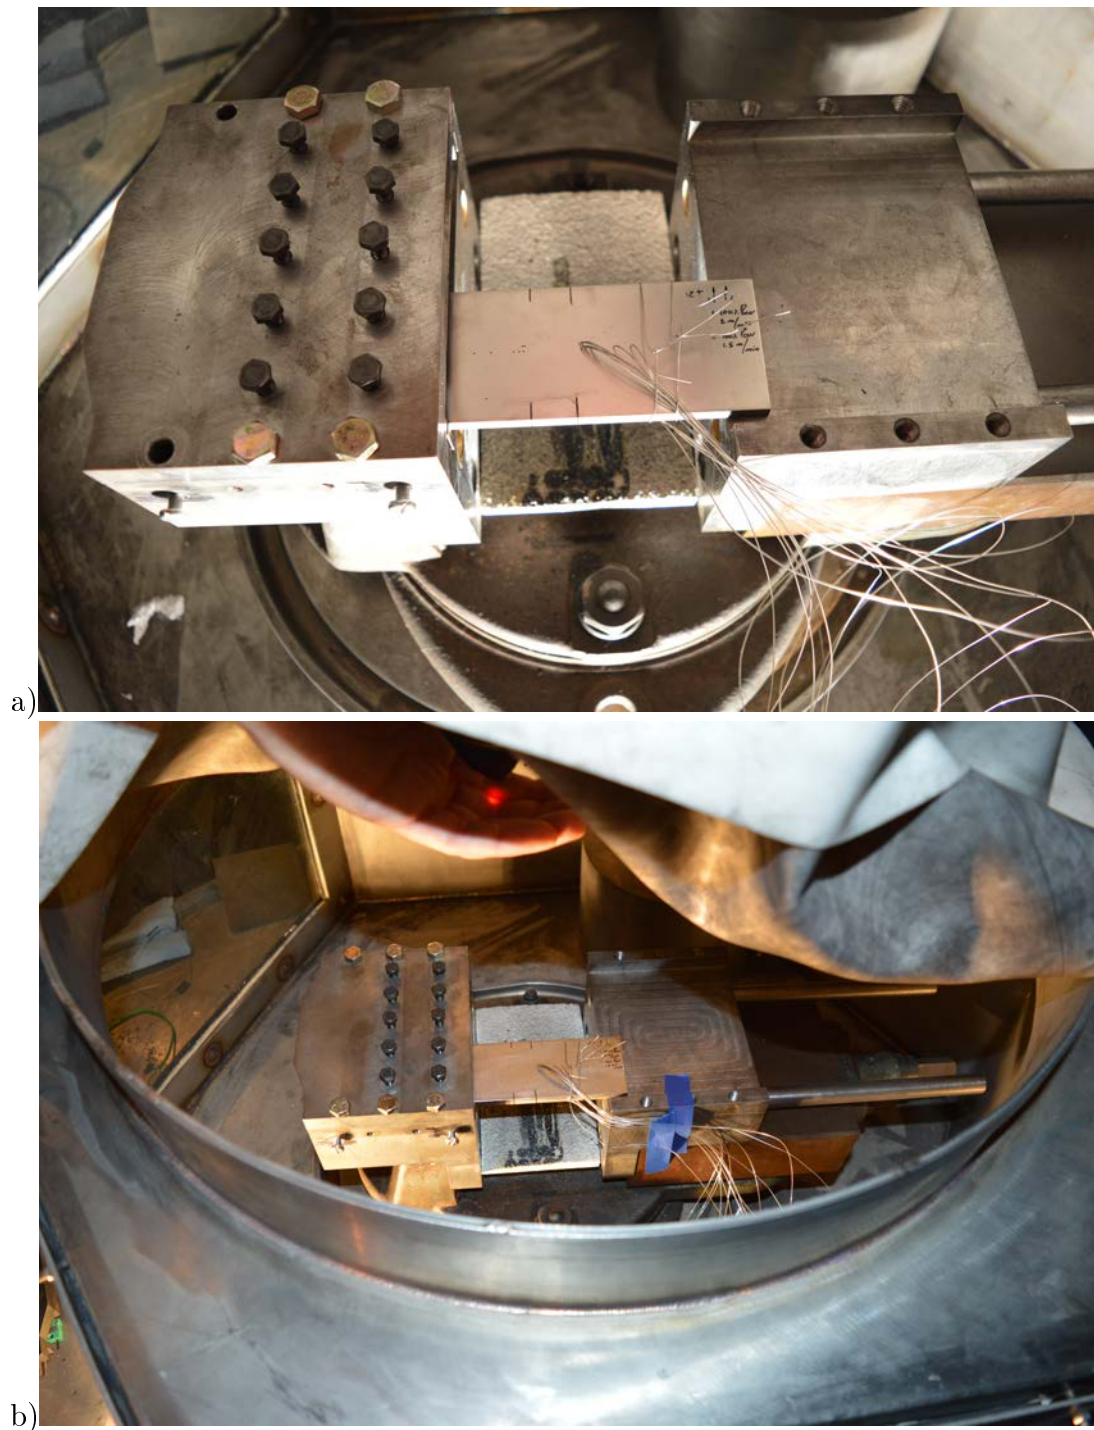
Photographs showing a) the jig used to fix the plates during welding tests and b) the assembly placed in the welding chamber to operate in inert atmosphere
